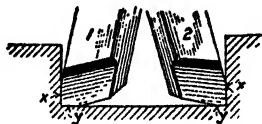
Tool bits for finishing square-shoulder cuts. Surfaces x and y are at an angle of 90 deg. or a trifle less.
